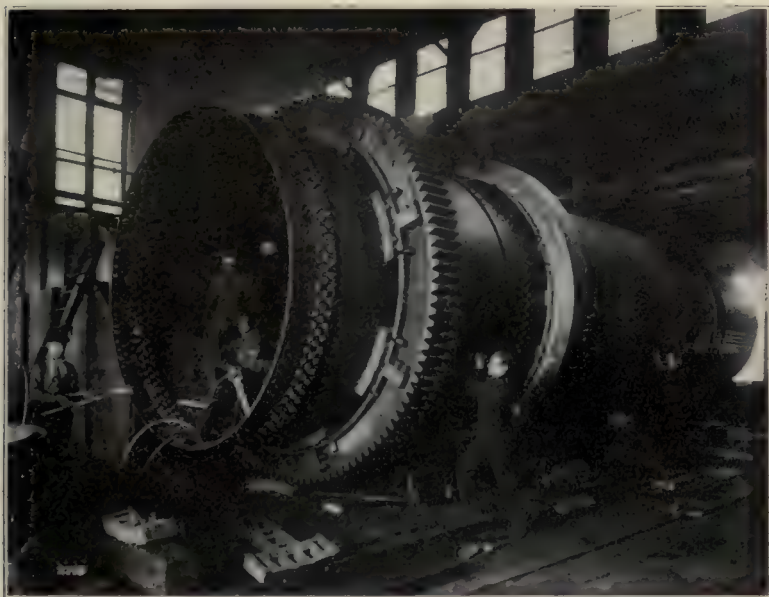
SECTION OF KILN SHELL SHOWING GEAR AND RIDING RING.
